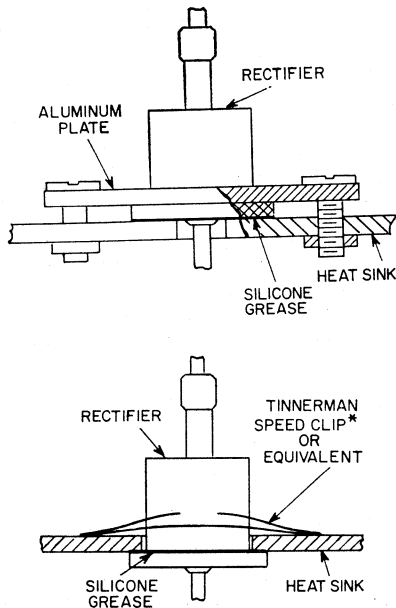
Suggested methods for attaching rectifier types 1N2858A through 1N2864A to heat sink.
